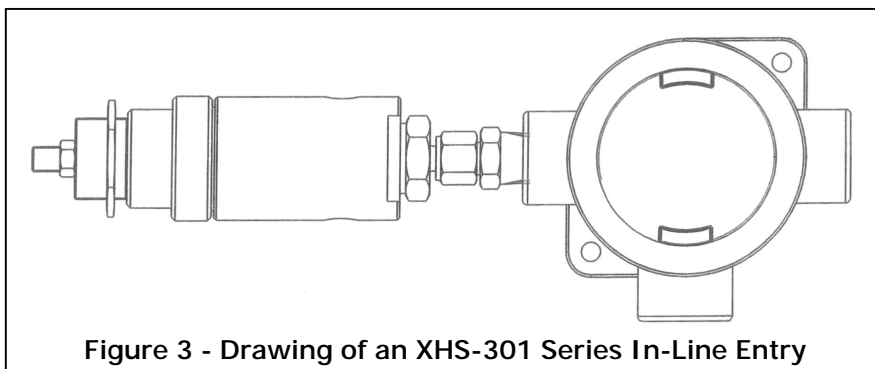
Drawing of an XHS-301 Series In-Line Entry
